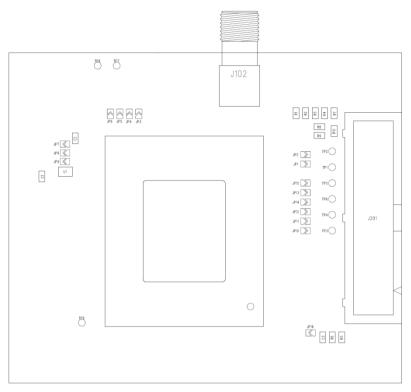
AirPrime SL6087 Socket-Up Board (Top View)
